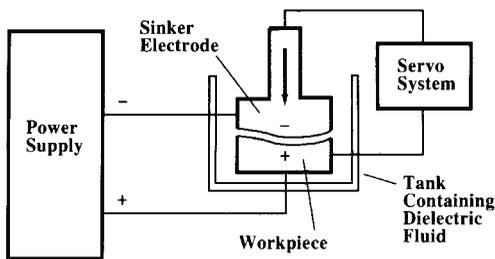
Sinker or Plunge Type EDM Machines Are Used to Sink Cavities in Molds and Dies
